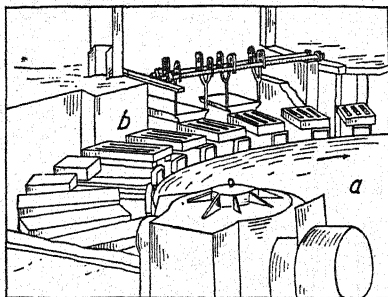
Commercial copper form-casting machine. *a.* Casting wheel, or table. *b.* Moulds. (Courtesy of Anaconda Copper Mining Company.)
